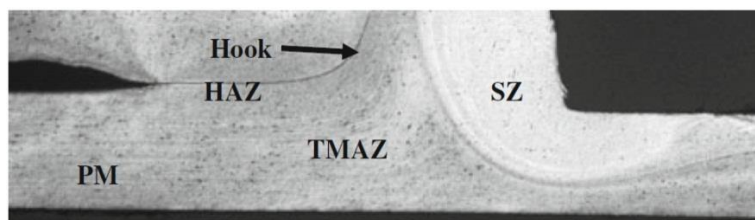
Cross-section view of a typical FSSW sample [45].
